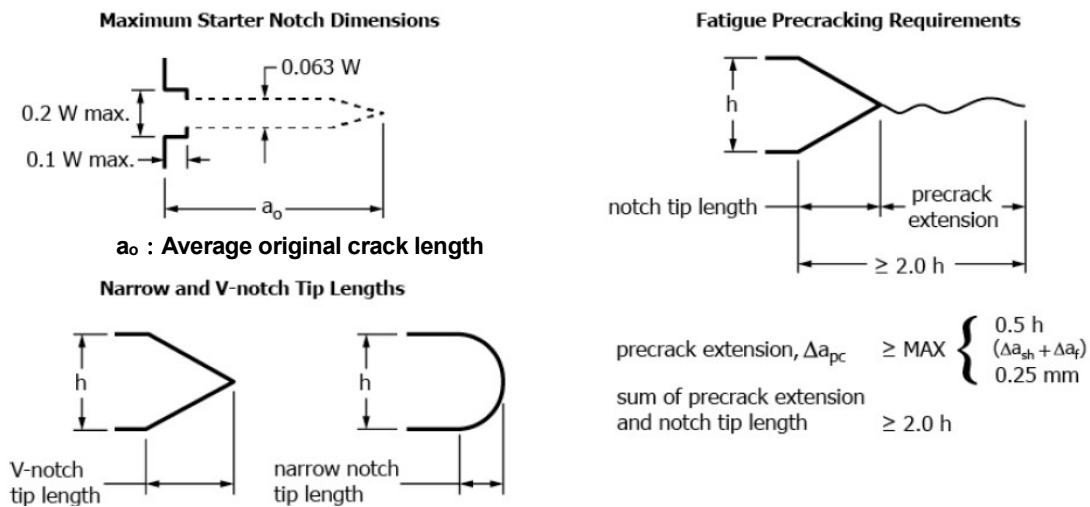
Envelope of fatigue crack and crack starter notches, and requirement of fatigue crack length²⁾
